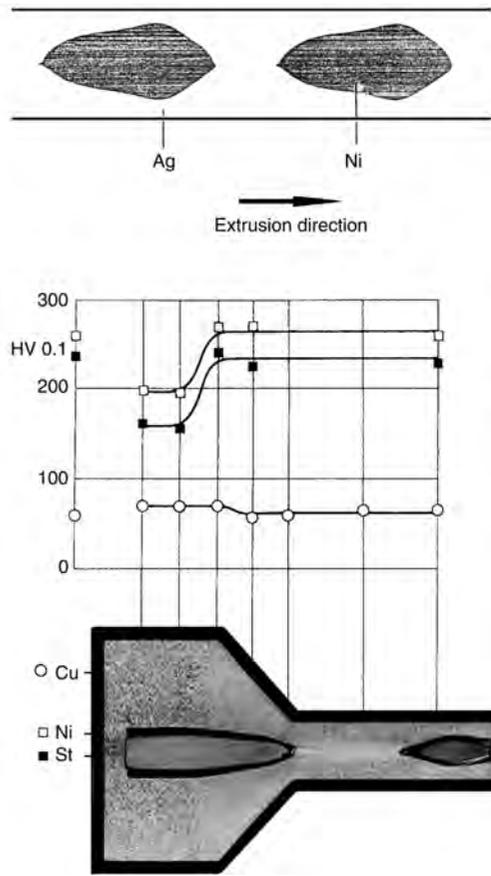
Example of core fracture. The core material used is periodically broken.
